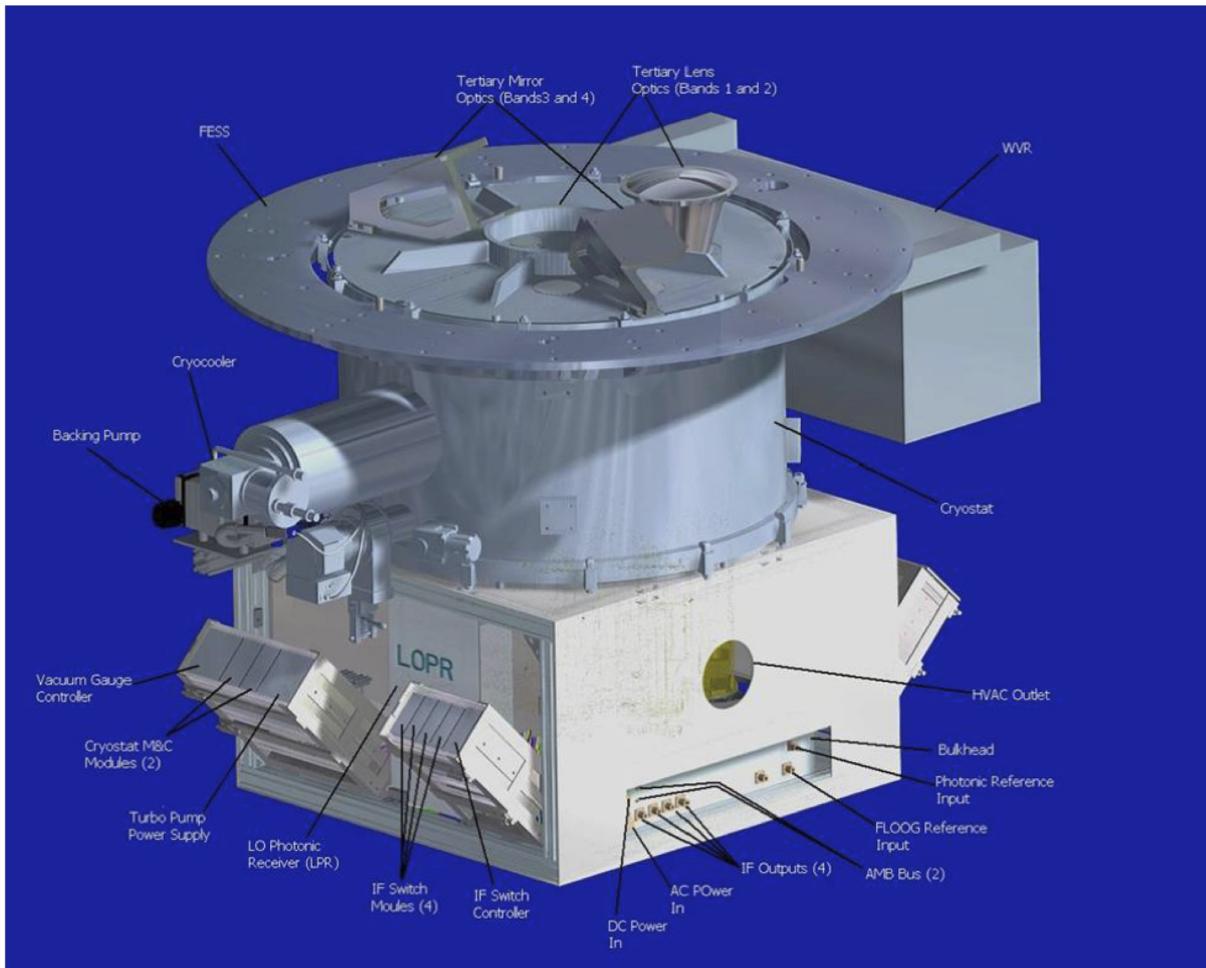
Side view of ALMA front end showing cryostat assembly, with room temperature unit below.
